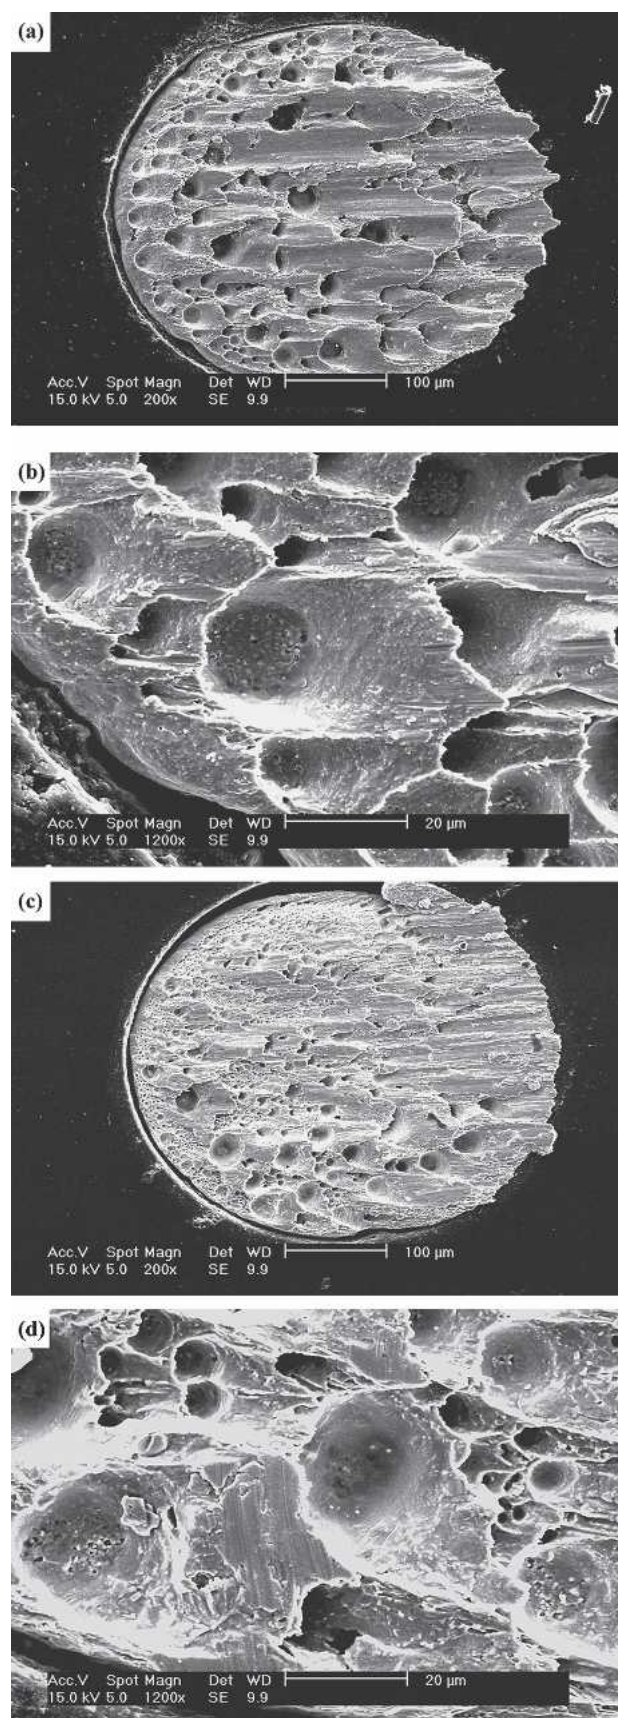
Typical fractography of the solder joints in BGA packages after ball shear tests: (a, b) Sn3Ag0.5Cu; (c, d) Sn3Ag0.5Cu0.06Ni0.01Ge.
